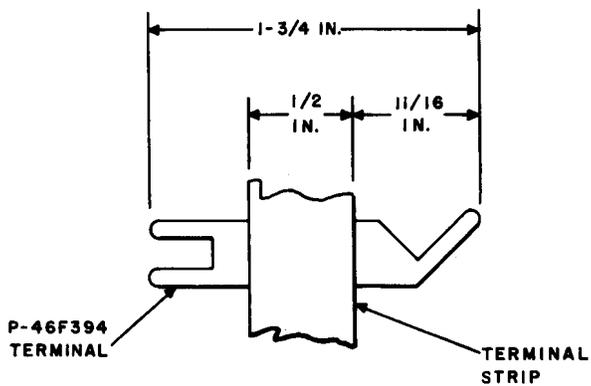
P-46F394 Flat Punched Terminals Arranged for Wrapped Connections
